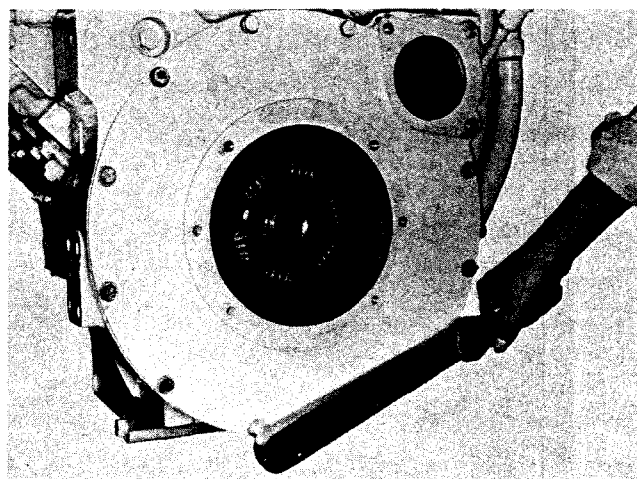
, (V11478). Torquing adapter plate capscrews
